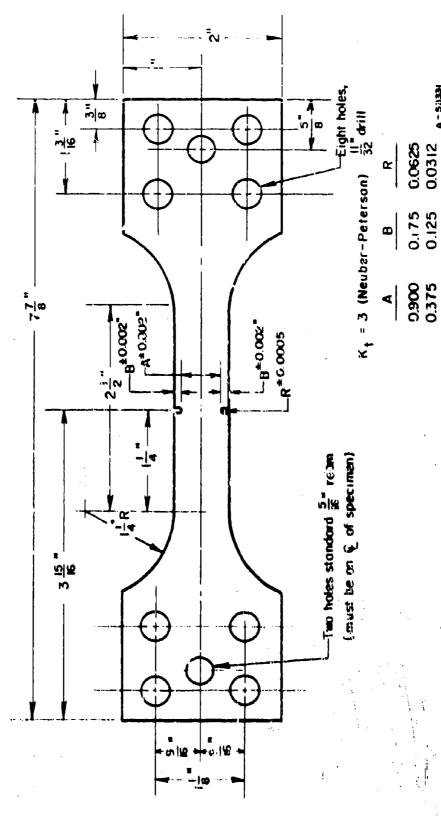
NOTCHED (K = 3) SHEET FATIGUE SPECIMEN
